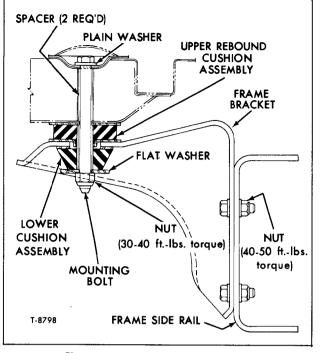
Cab Front Mount (with Upper and Lower Cushion)
